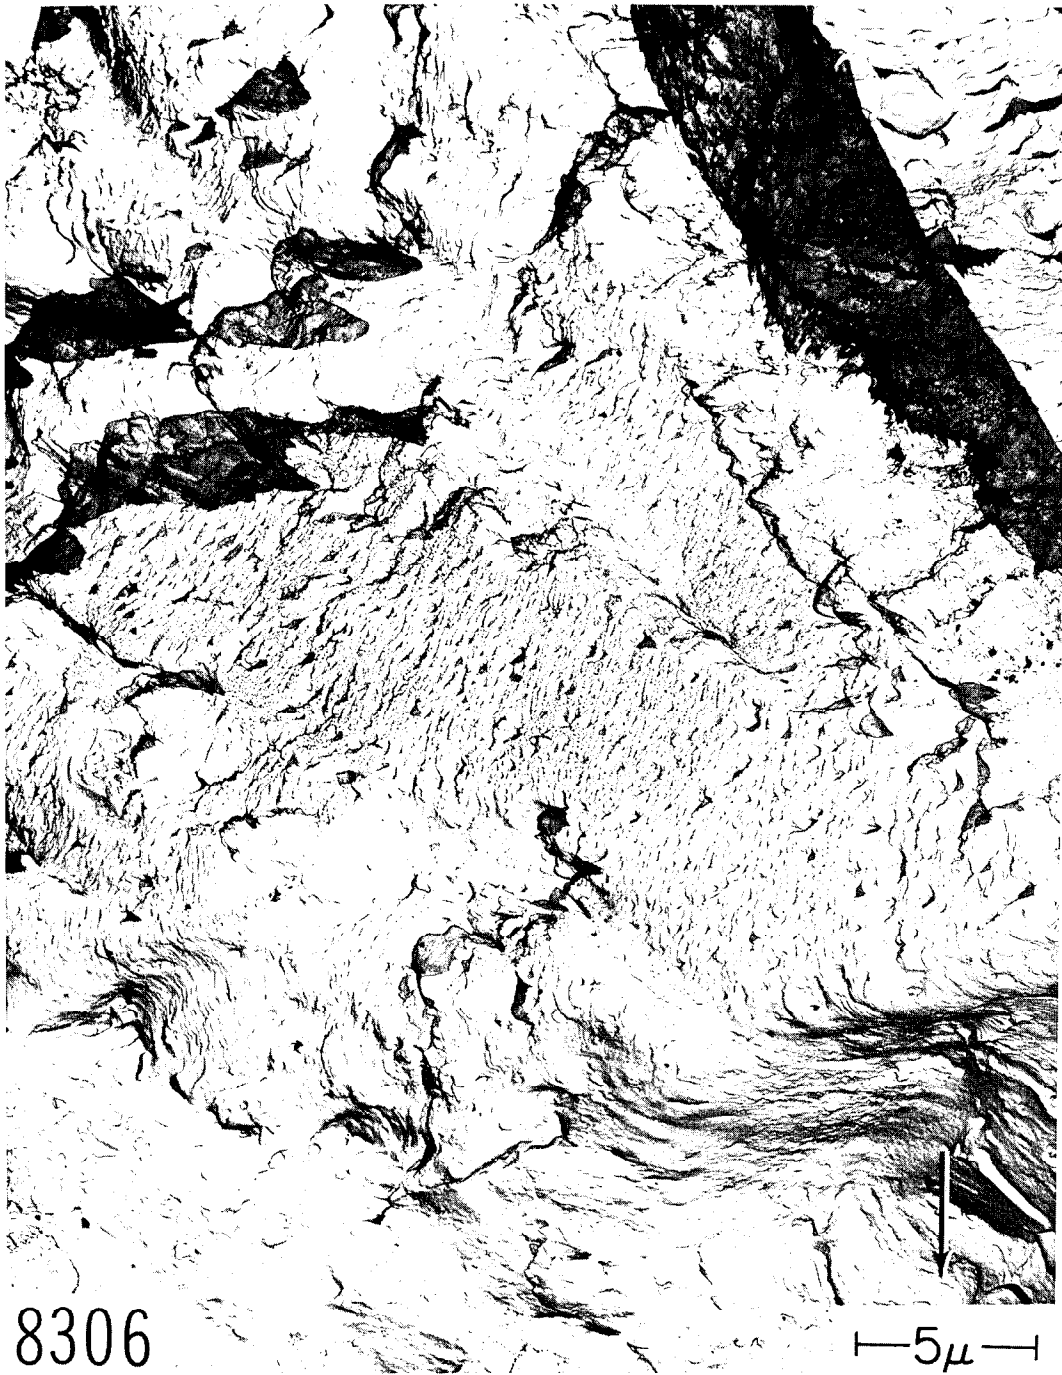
Tension-tension plane-strain fatigue markings in the WR fracture direction in 2020 T651 aluminum alloy. Cellulose acetate-carbon replication technique. Palladium shadowed. 6000X.
